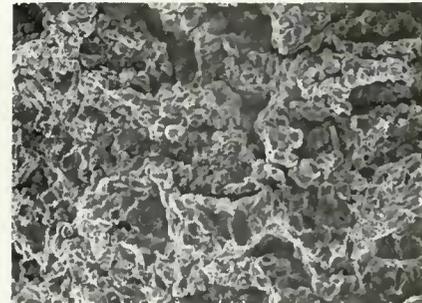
Scanning electron microscope micrograph of the fracture surface of a transverse weld specimen with totally austenitic base and weld metals,  $\times 575$  (reduced 54% on reproduction)
